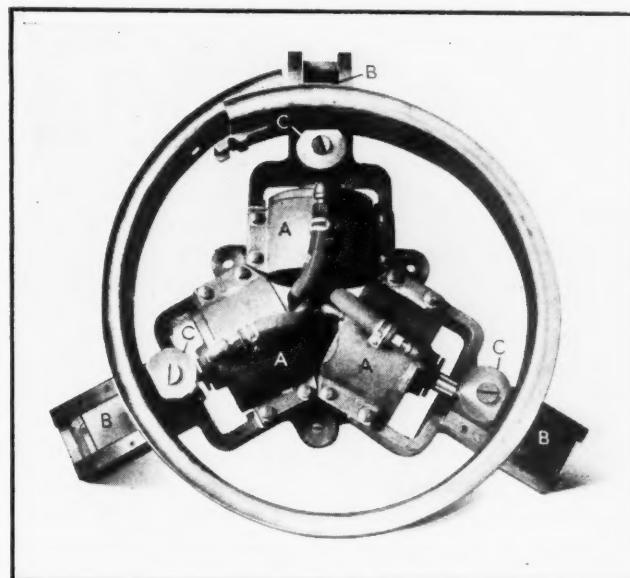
Fixture Designed to Facilitate the Assembly of Automobile Tires on Rims
